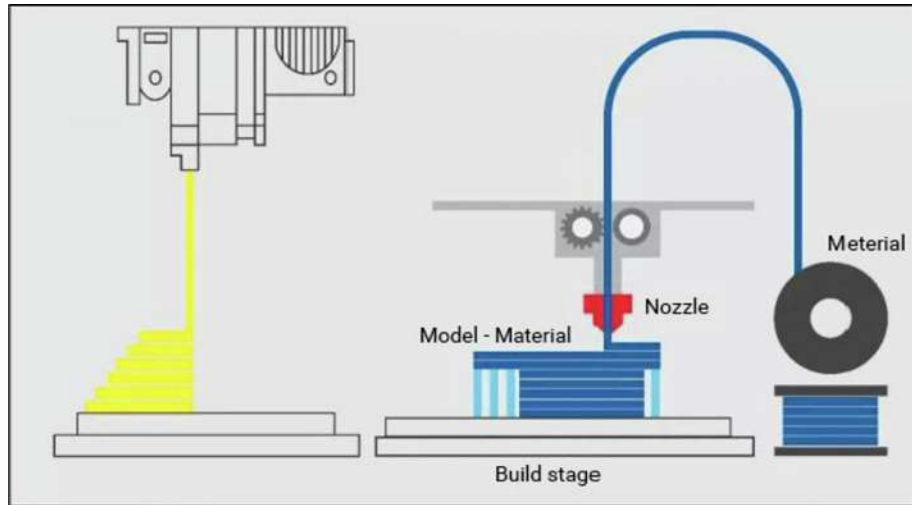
Fused Deposition Modelling (Source: www.pcbway.com).
